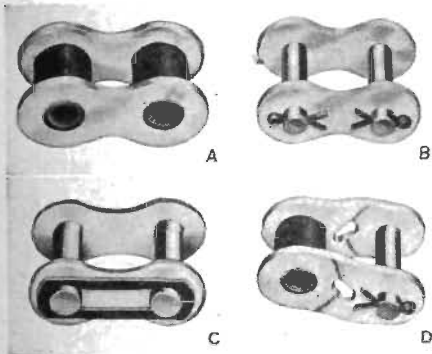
Roller chain parts: A, inside roller link; B, connecting outside link; C, spring clip connecting outside link; D, offset or half link.
